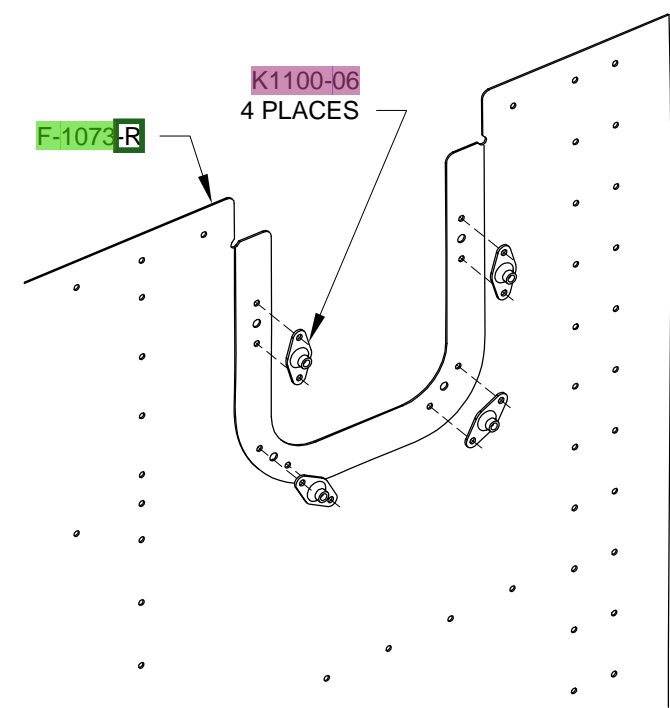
RIVETING THE COVER PLATE NUTPLATES
